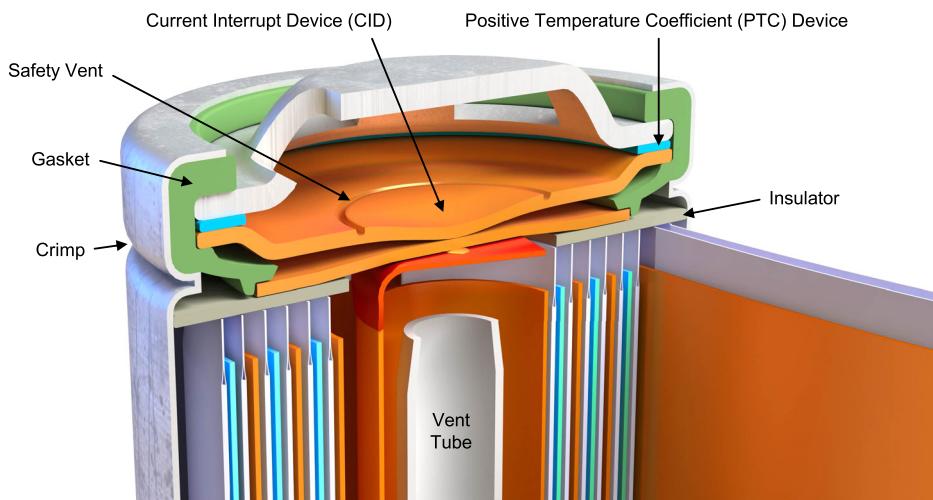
Rendered cross sectional view of an 18650 cell positive terminal cap assembly.
